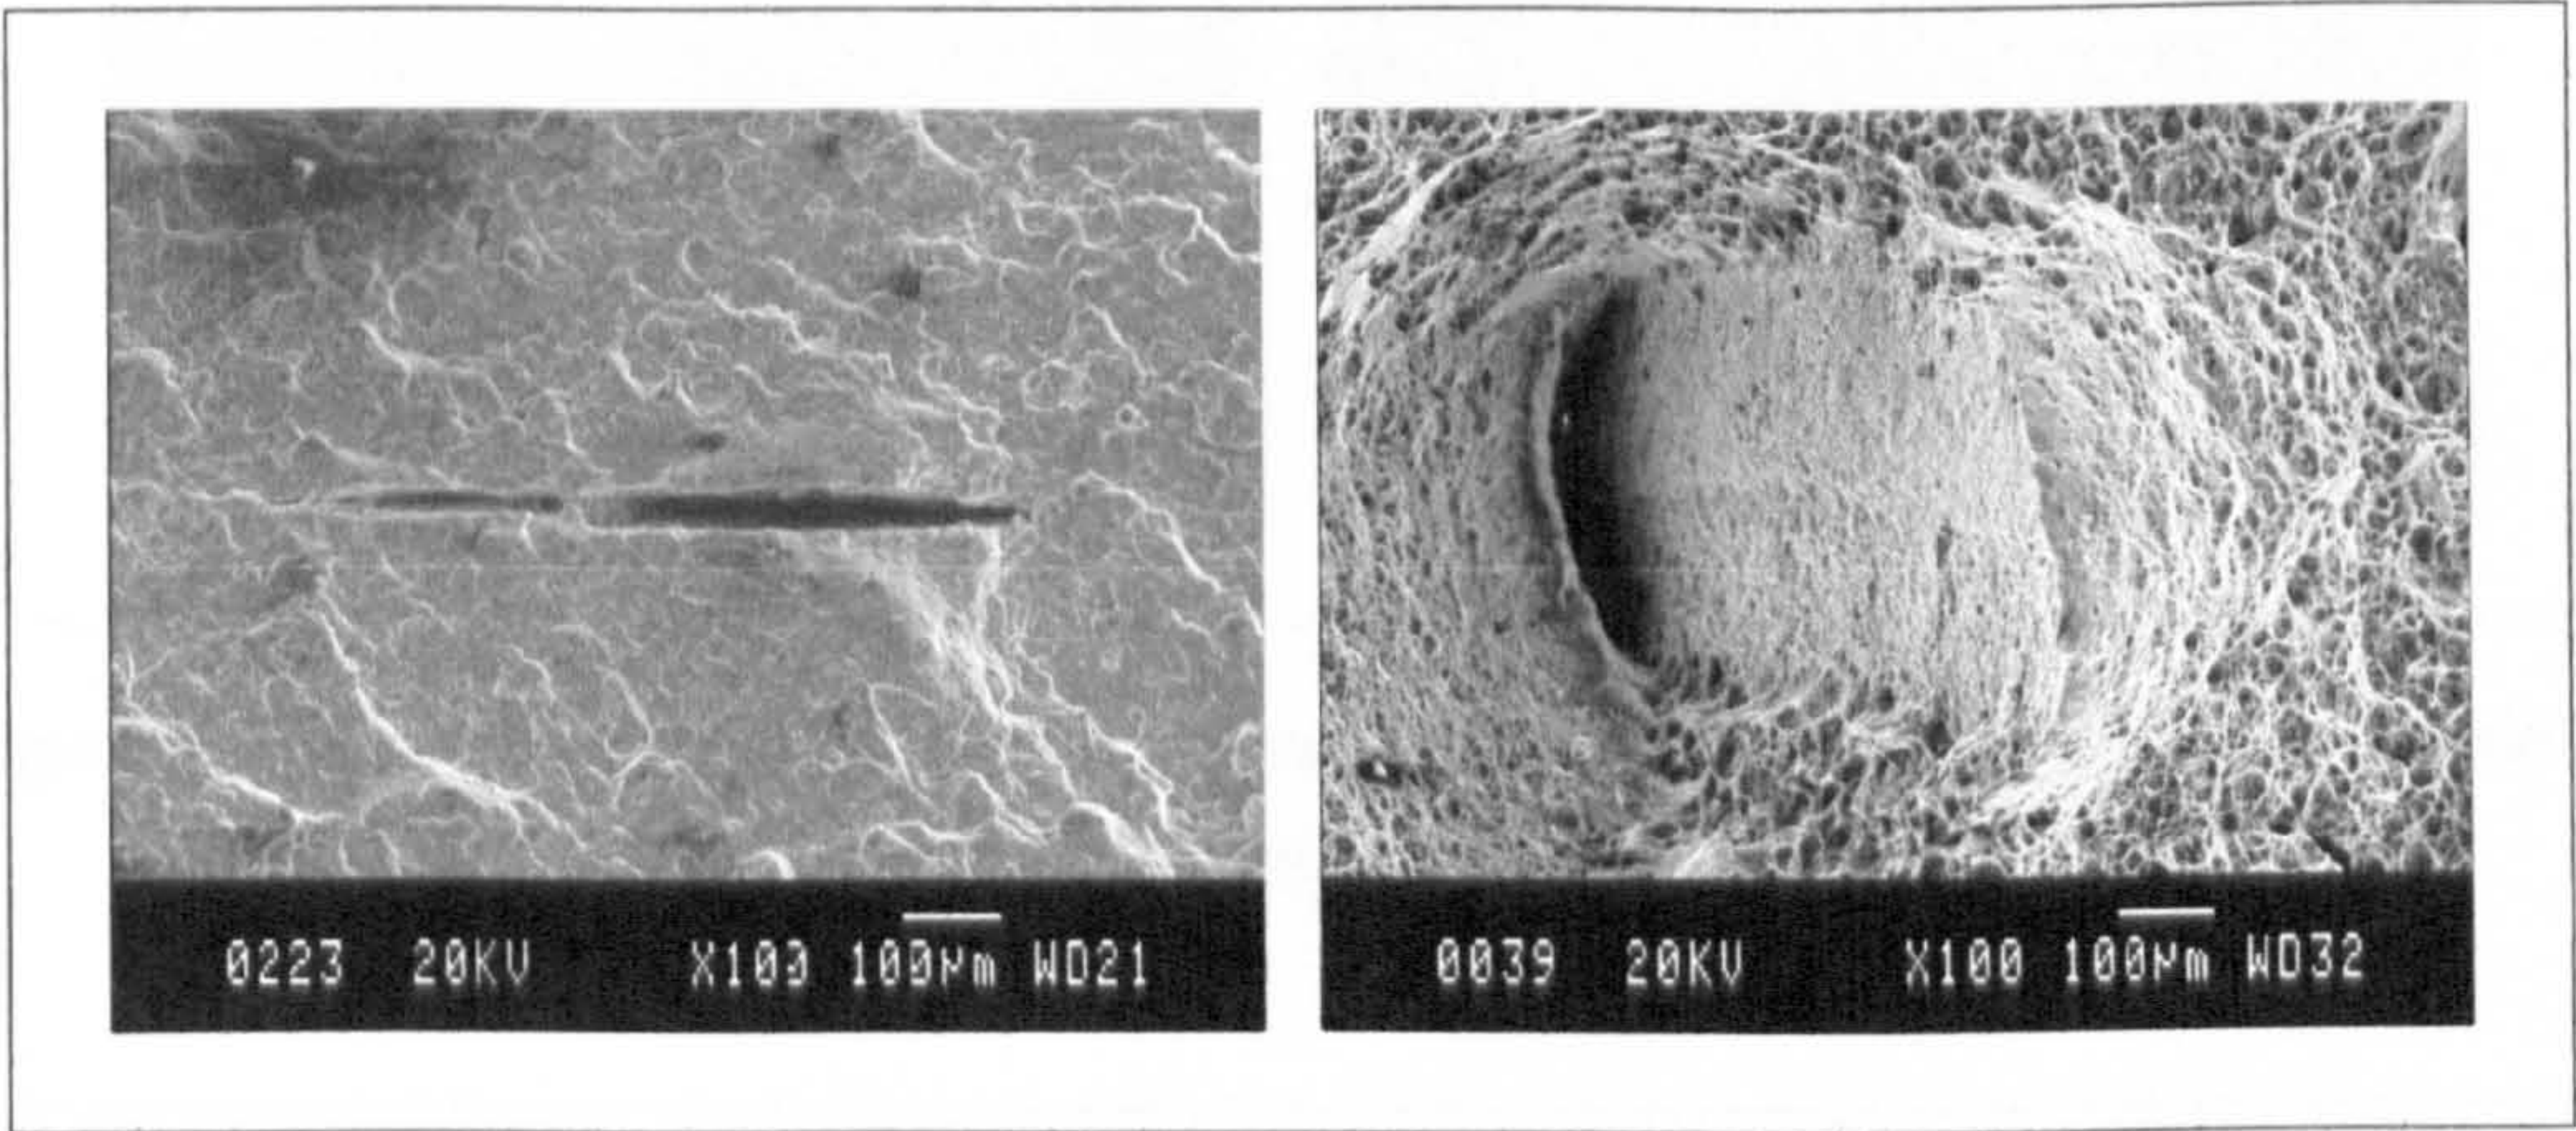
PFD, fatigue fracture surface (left), fast fracture surface (right), (FS SP 1).
